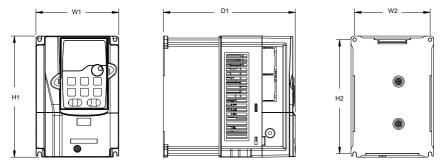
Wall-mounting drawing for the 380V 0011-0045 models
